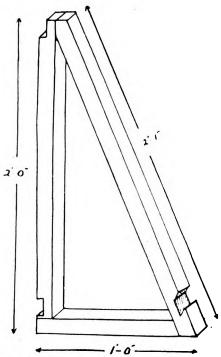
Showing shape of stand and position of crossbars. Shaded parts show joints.
